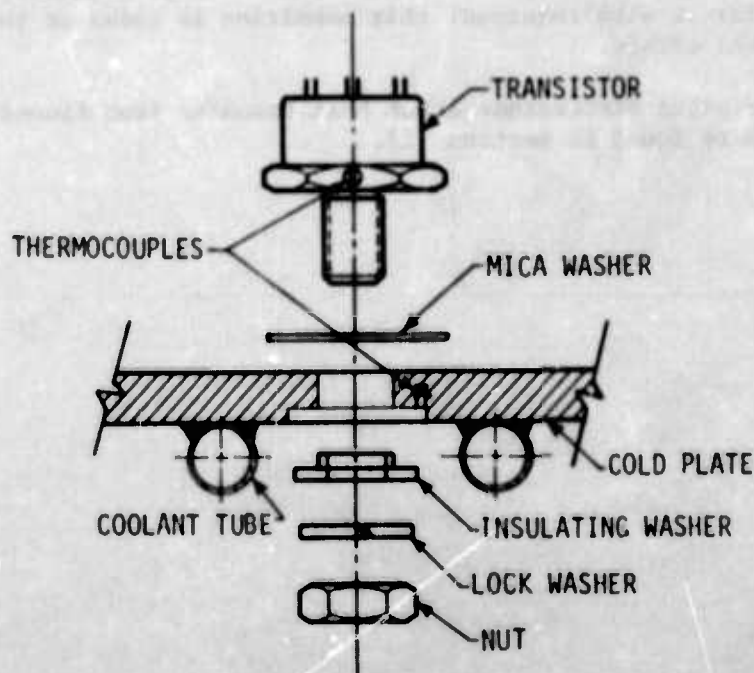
Transistor Mounting on Liquid-Cooled Cold Plate No. 1
